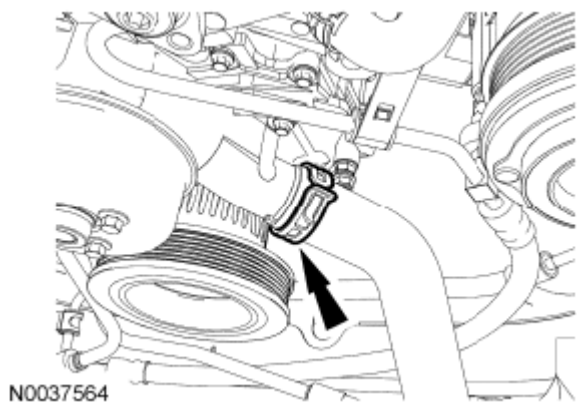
Locating Lower Radiator Hose From Coolant Pump
